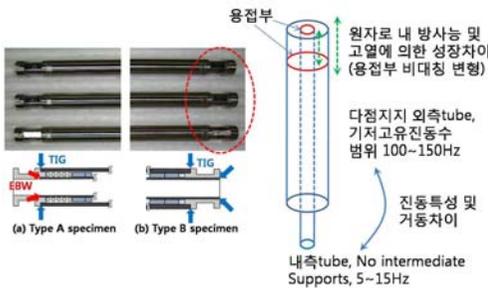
Welded end cap of Dual-cooled annular fuel rod and influencing factors to fatigue failure of that welded part.
